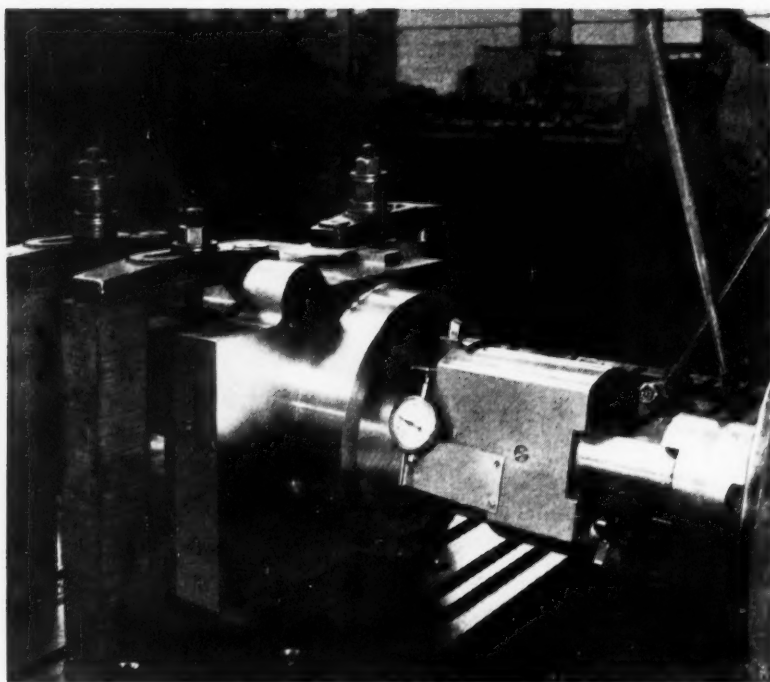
Finish-boring the Breech Ring on a Horizontal Boring, Drilling, and Milling Machine Preliminary to Threading the Ring Internally on the Same Machine
